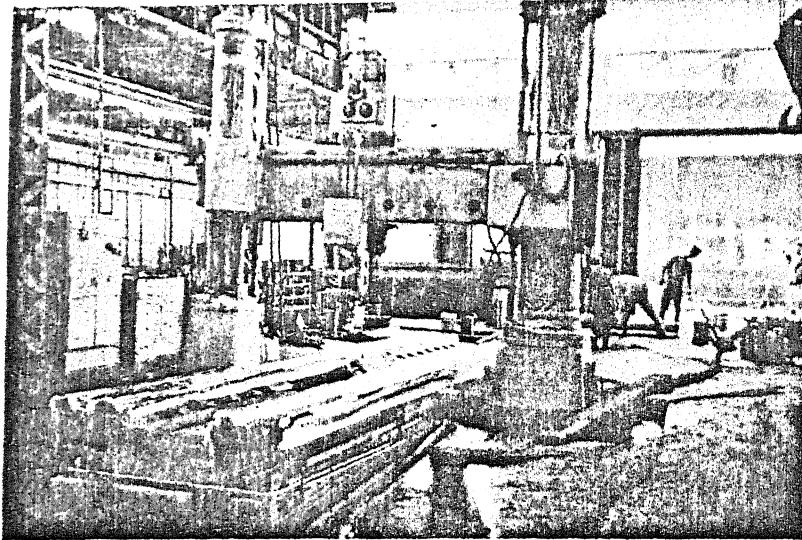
JIG BORER, SETTLED TO THE RIVER SIDE.
